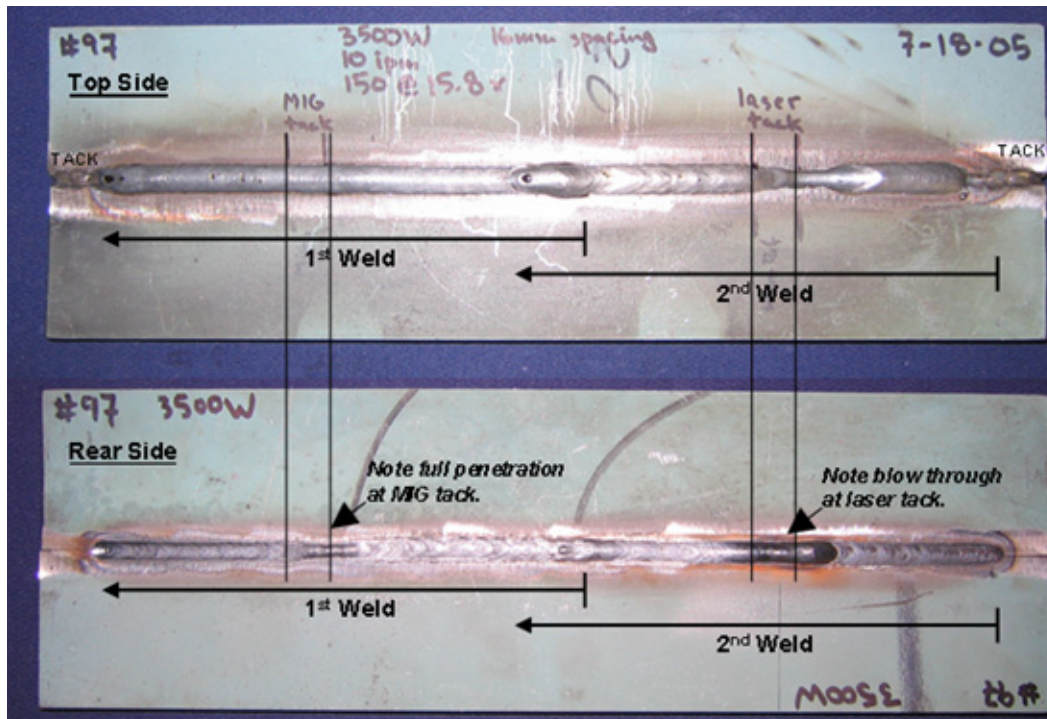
The front and backside of two experiments to (a) investigate the ability to weld over tack welds and (b) determine issues involved in weld overlap (necessary for circumferential pipe welds).
